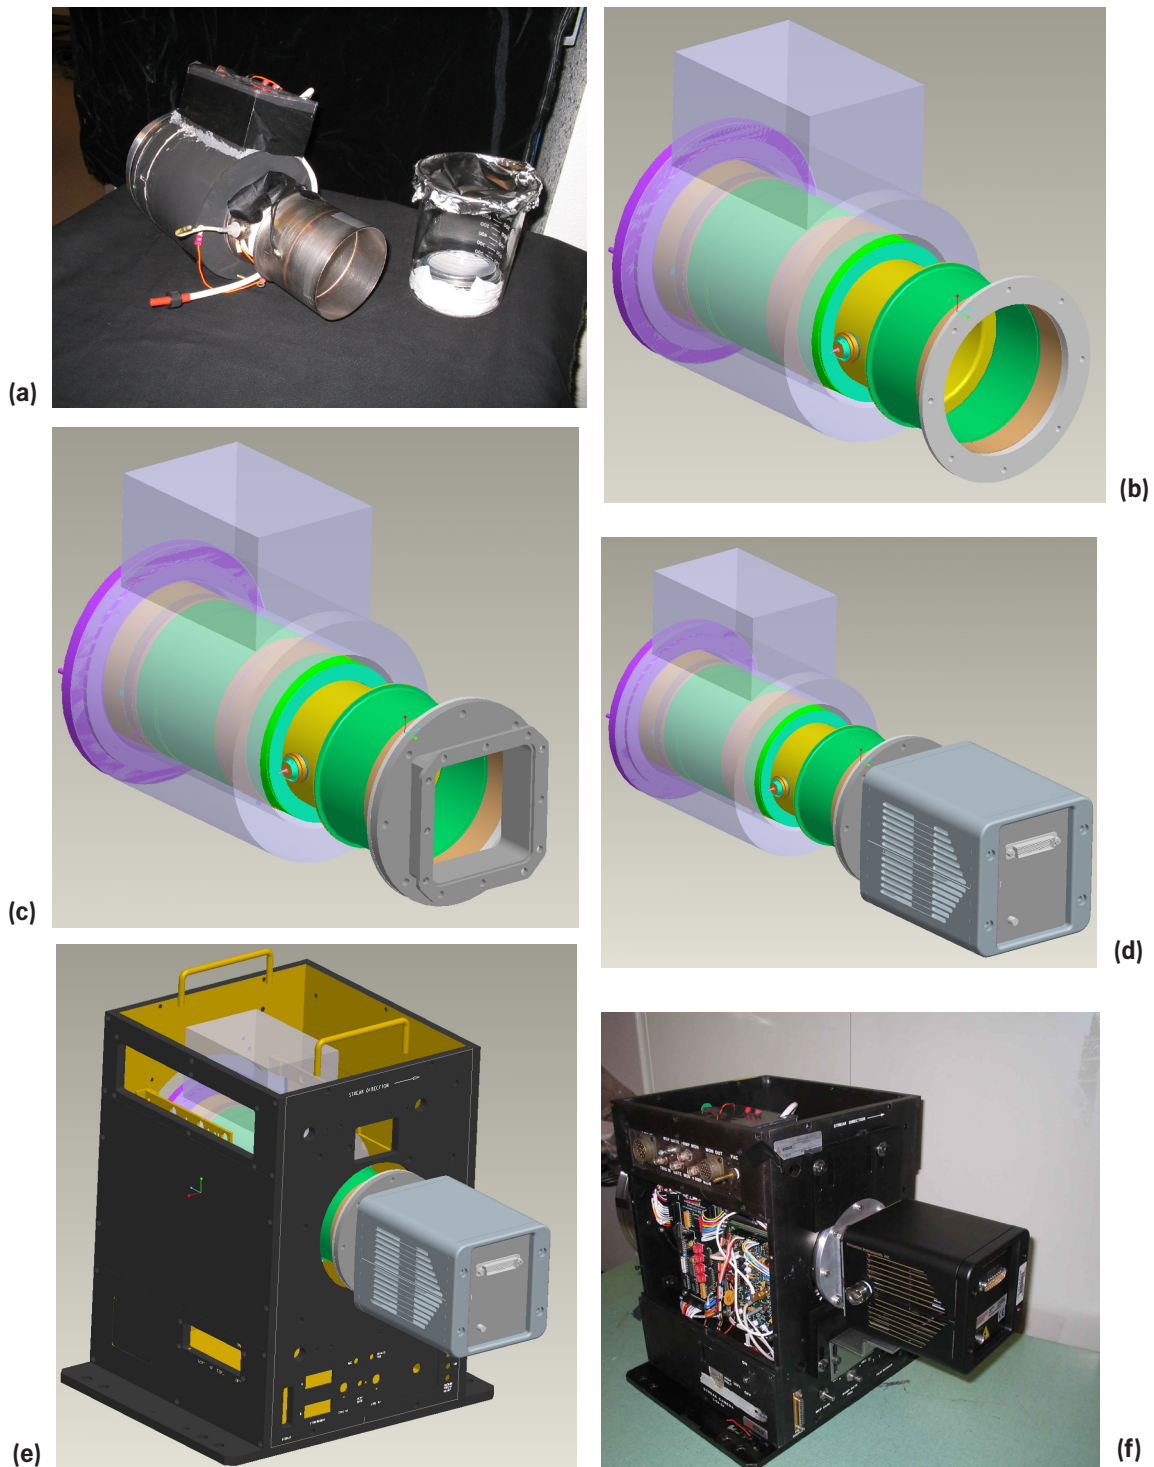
X-ray streak camera modification process: a) P-20 phosphor removal, b) welded flange design, c) welded flange to 2K x 2K CCD camera adaptor design, d) assembly of x-ray streak tube and 2K x 2K CCD camera, e) x-ray streak tube chassis design, f) fabricated and assembled finished product
